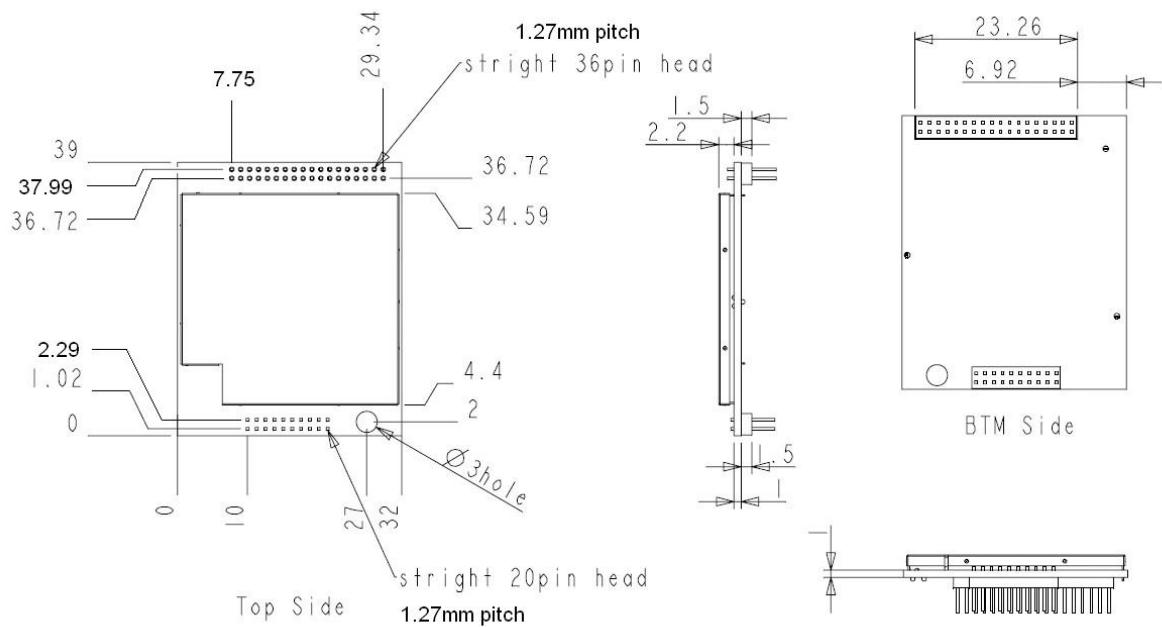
WIZ610WI Board Dimensions (unit : mm)
